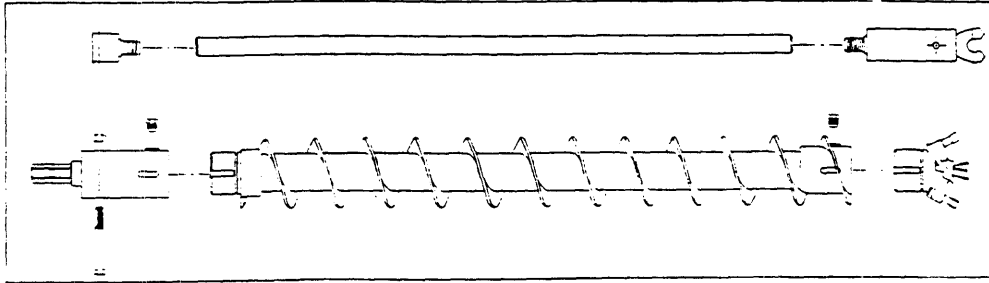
Schematic Drawing of a Hollow Stem Continuous Flight Auger
